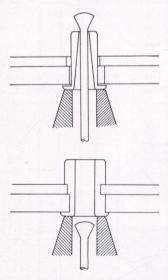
Chobert Rivet. A mandrel is used to expand the shank, leaving essentially a tubular rivet. It can be plugged if additional strength or water tightness is required. Mandrel is reusable. Riveting can be done by hand or machine.
